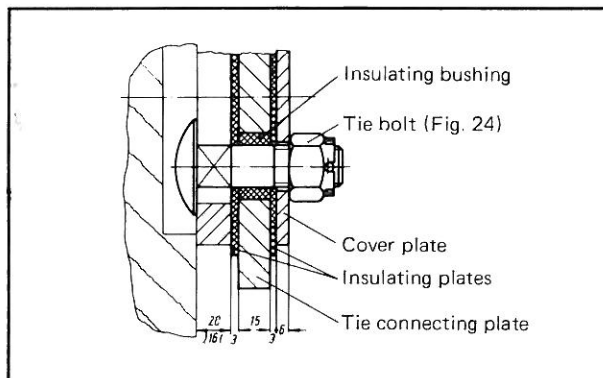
Section through tie connecting plate mounting when attached to insulated switch
